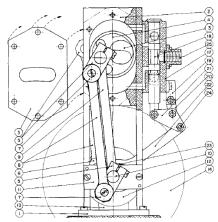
Illustrated Assembly View of an Antique Engine Named "An Unusual Steam Engine" [7].
